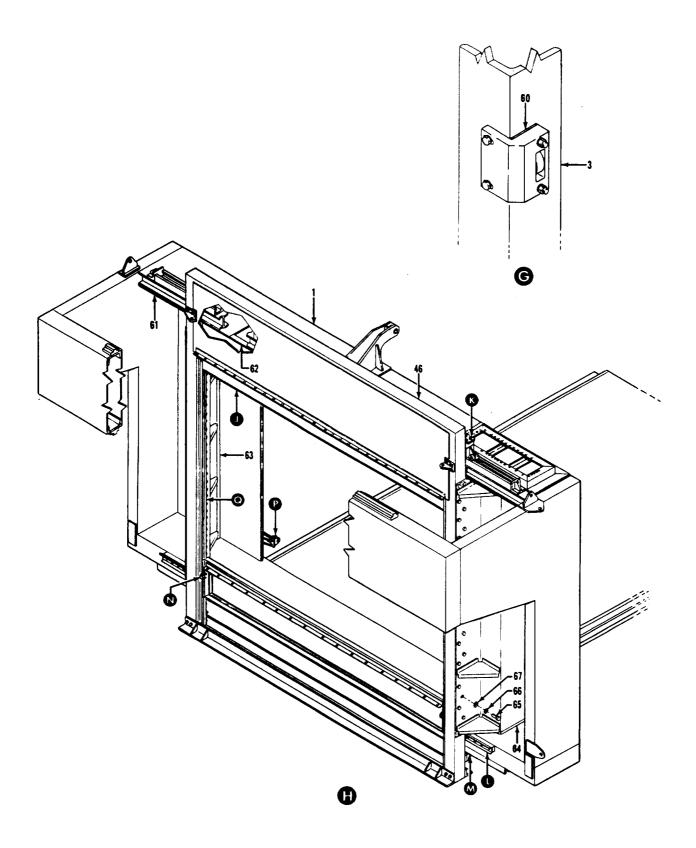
Extension Platform Assembly (Sheet 6 of 13)
